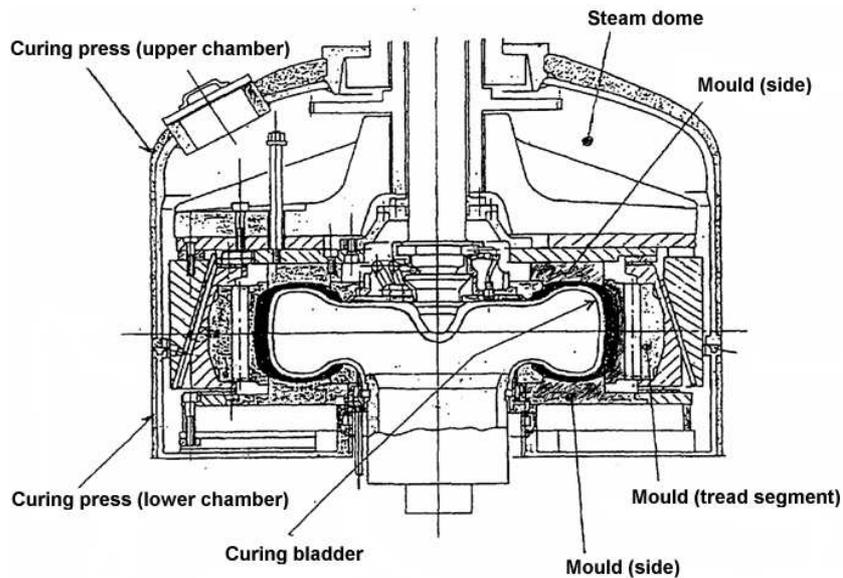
Curing press sketch: this is a vertical section of a steam-dome curing press, highlighting mould, bladder and other components.
